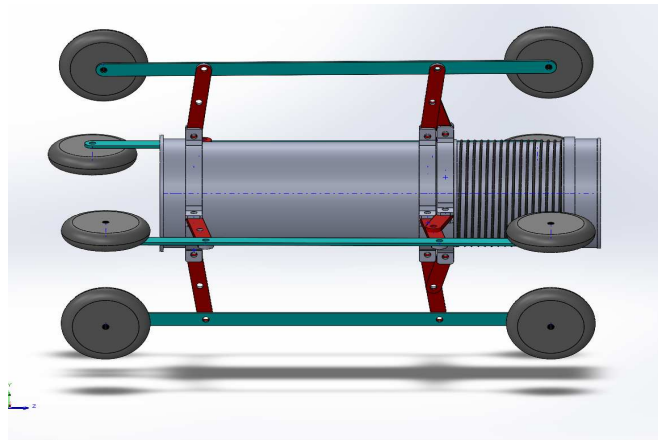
Side of Pipe Inspection Robot (This design showcases components such as wheels (in grey), primary links (in red), secondary links (in blue), and spring elements (on the right appears as a threaded element)).
